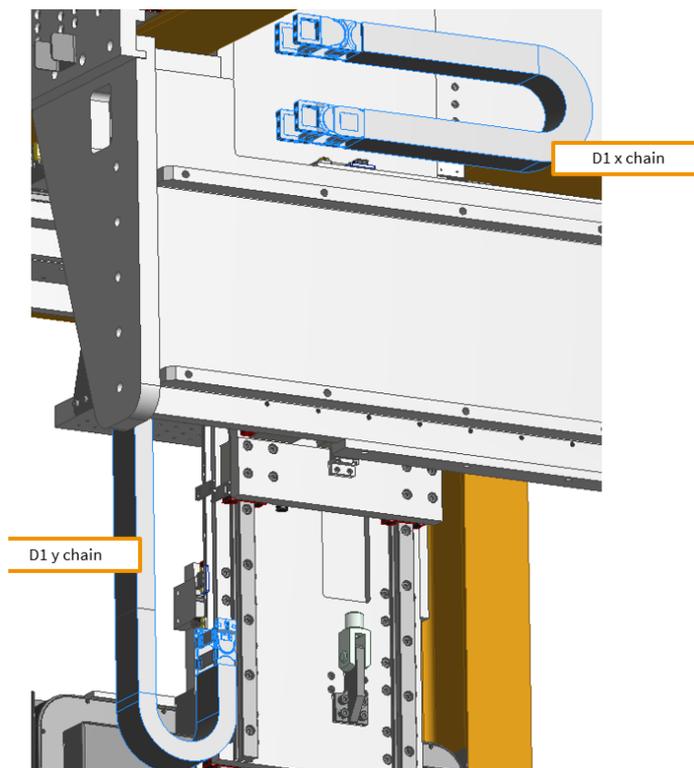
View of the cable drag chains along the Y and X axes for D1 and D2 assemblies
